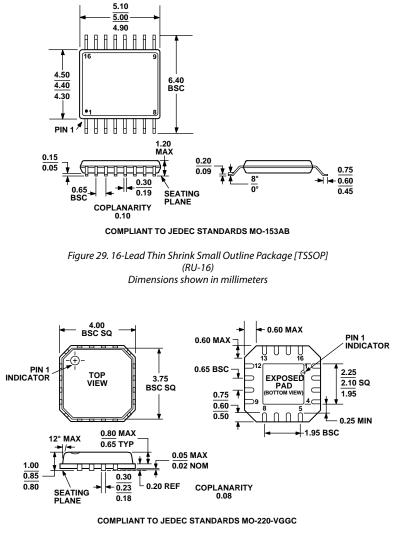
16-Lead Lead Frame Chip Scale Package [VQ\_LFCSP] 4 mm × 4 mm Body, Very Thin Quad (CP-16-4) Dimensions shown in millimeters
